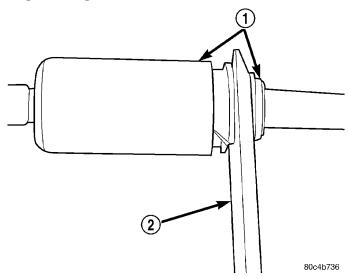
Disconnect Hydraulic Circuit Using Tool 6638A
